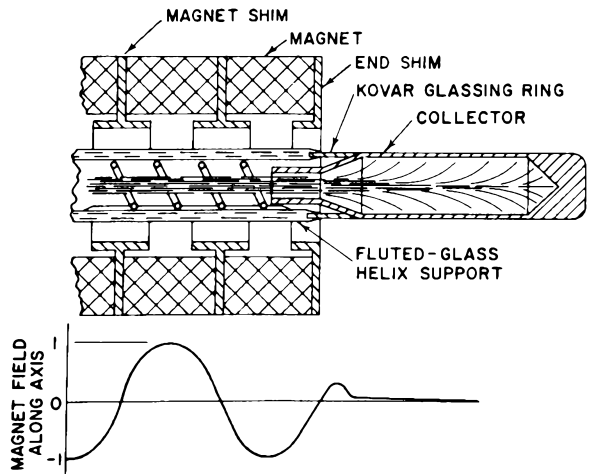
Cross Section of a Magnetically-Shielded Collector Assembly
